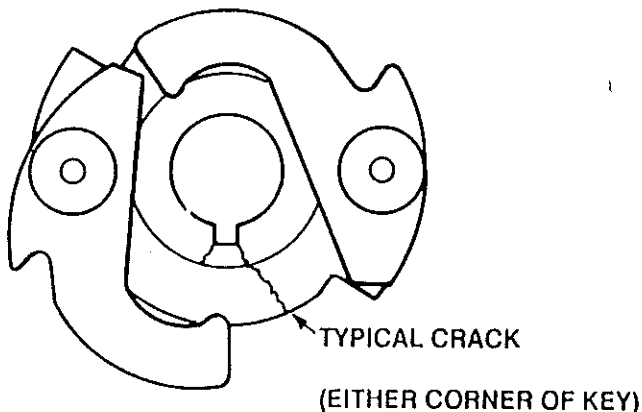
Typical Crack (Either Corner of Keyway)
